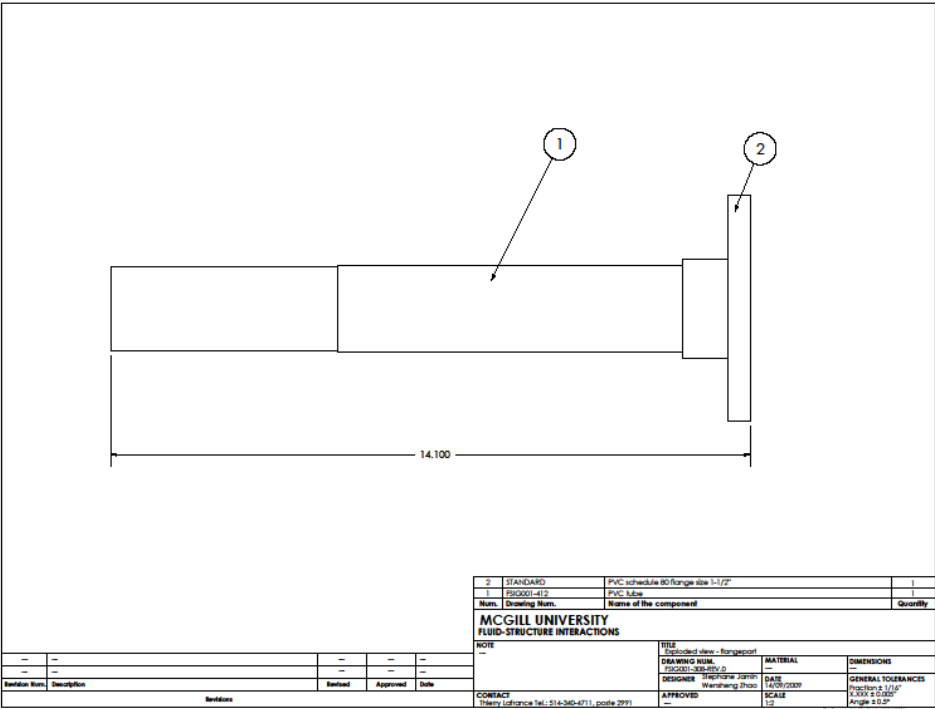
Sub-assembly drawing for the vessel: Flange part
